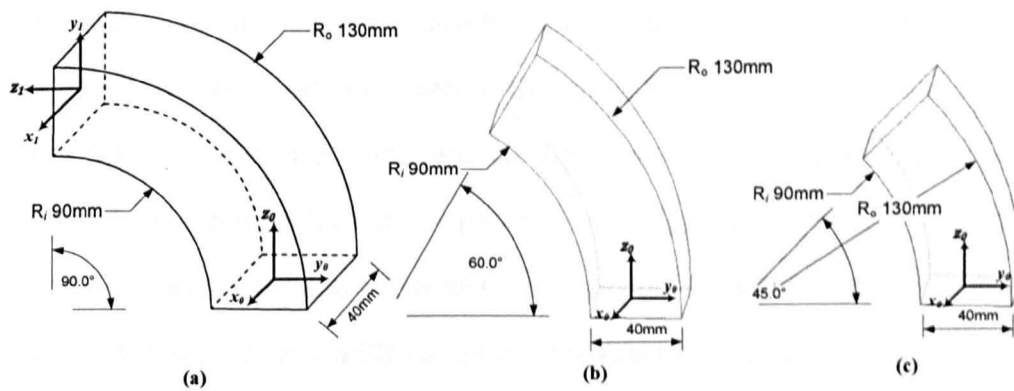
Nominal dimensions of a uniformly segmented 3D circular component: (a) for four component assembly; (b) for six component assembly; (c) for eight component assembly
